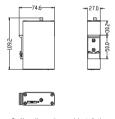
Outline dimension for IP20 model (wall-mounted housing)
